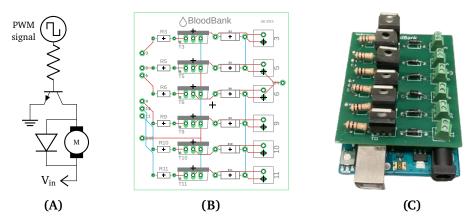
(A) Circuit controlling the DC motor of a peristaltic pump. (B) Schematic drawing of the PCB, including the circuit in sextuplicate. (C) Assembled PCB mounted on the SBM.
